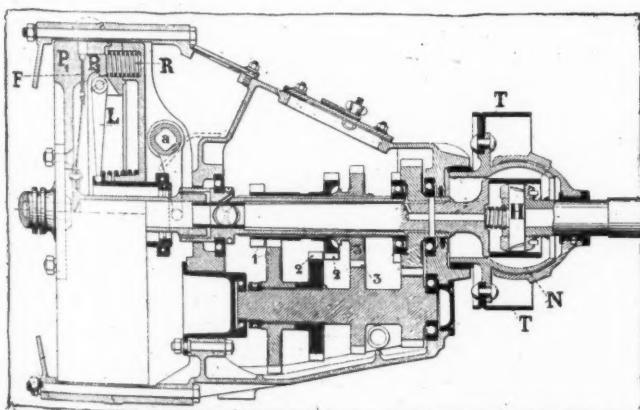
Showing very light Panhard plate clutch F in flywheel
